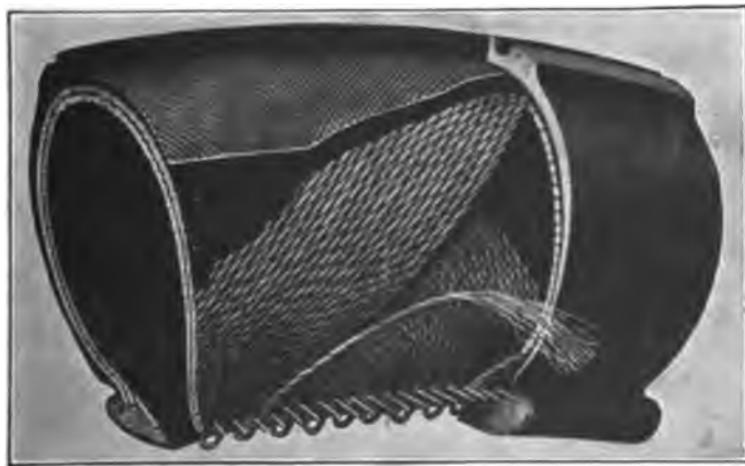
Section of Goodrich Silvertown Cord Tire, Showing Inner Construction
